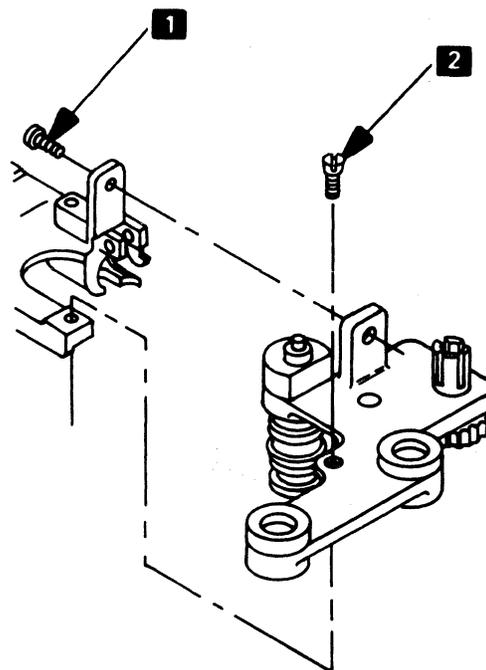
Ribbon Drive Removal (Ribbon-Cartridge Machines)
